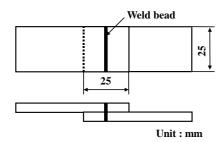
Testing specimen for tensile shear strength of lap welded joint
